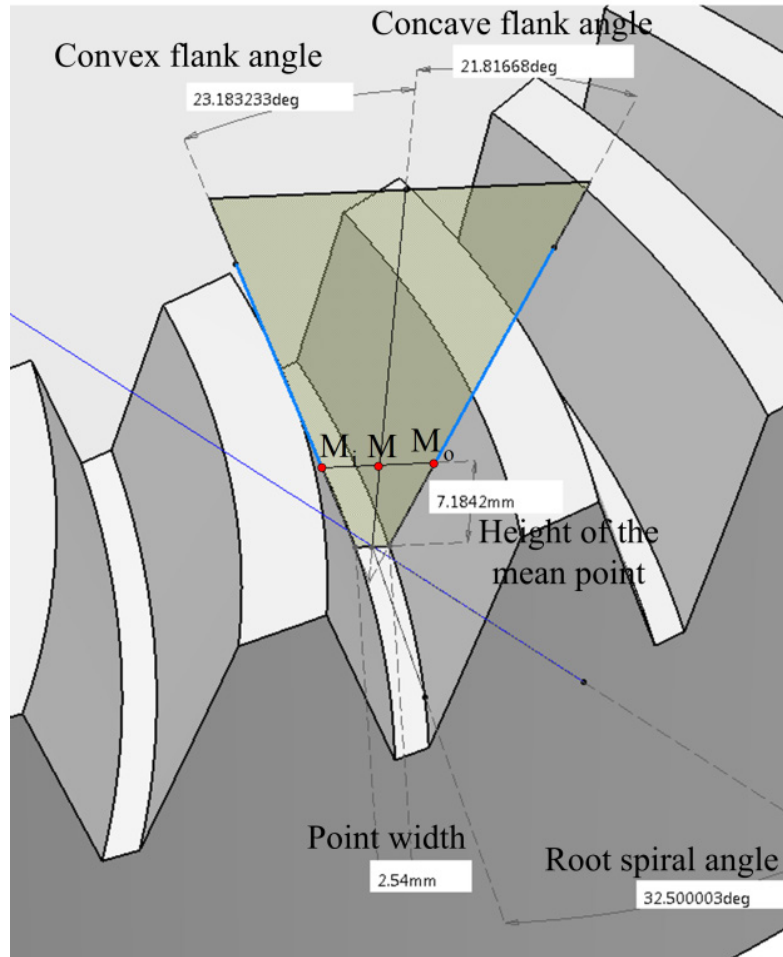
Gear tooth parameters measured on a virtually machined hypoid gear using a CAD/CAM software.
